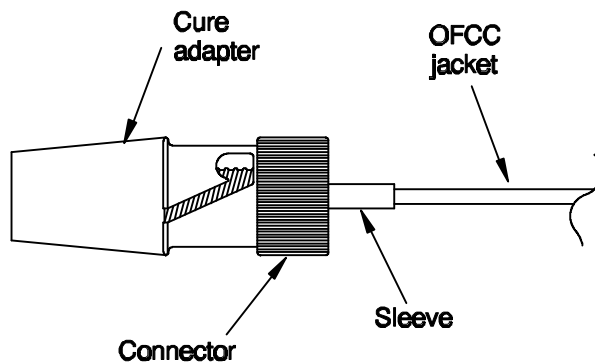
B1-7. Sliding the crimp sleeve over the connector barrel.
